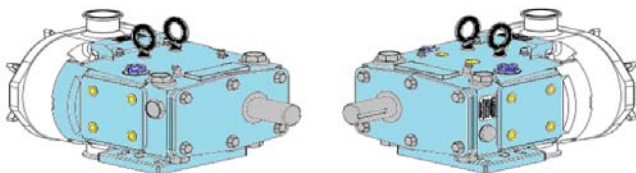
Bottom Mount Left Hand and Bottom Mount Right Hand
